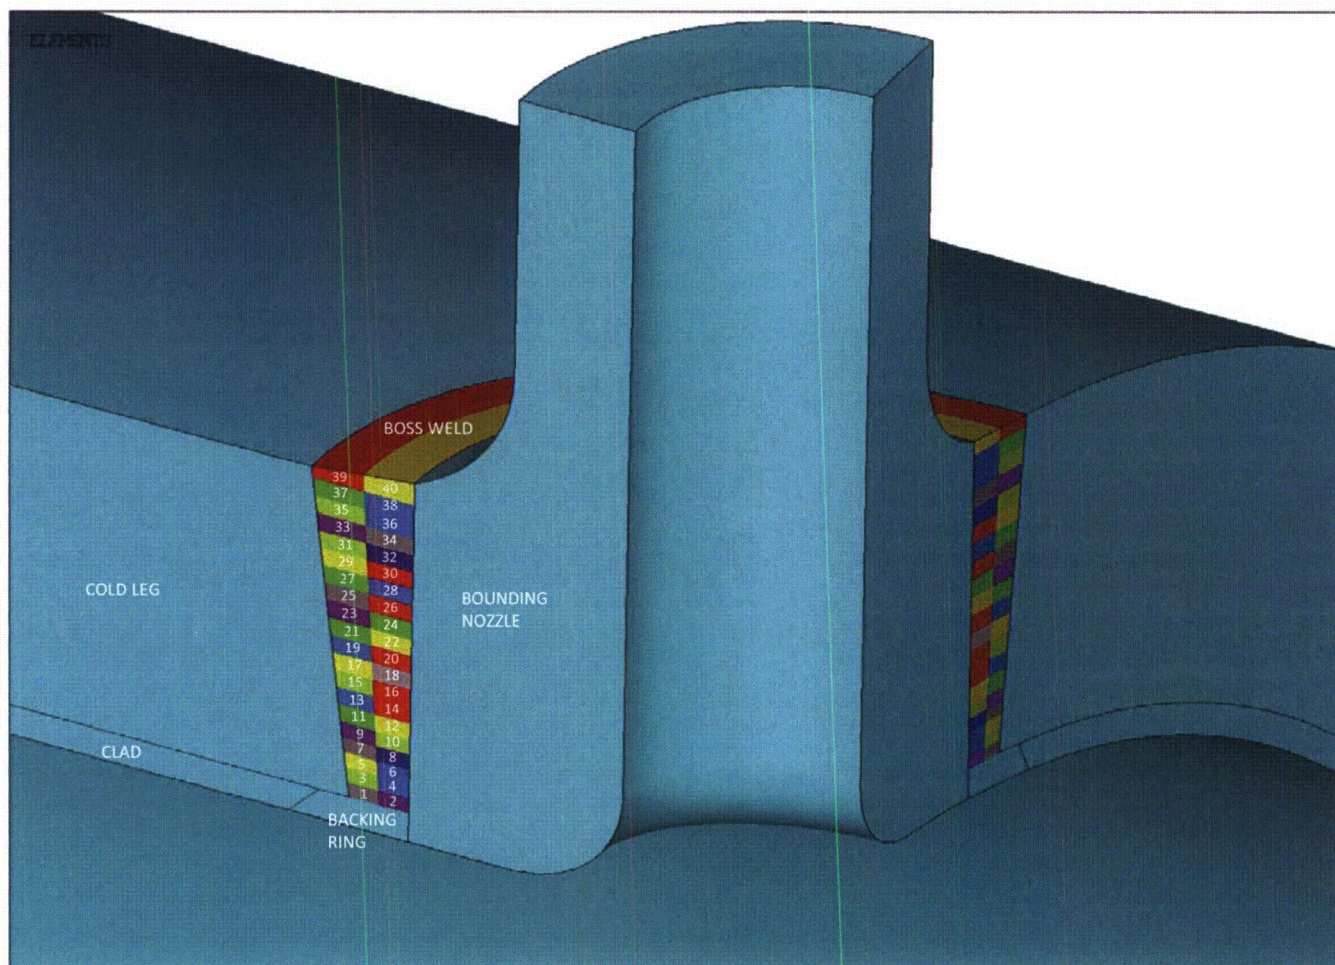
Weld Nugget Definitions for the Boss Weld
